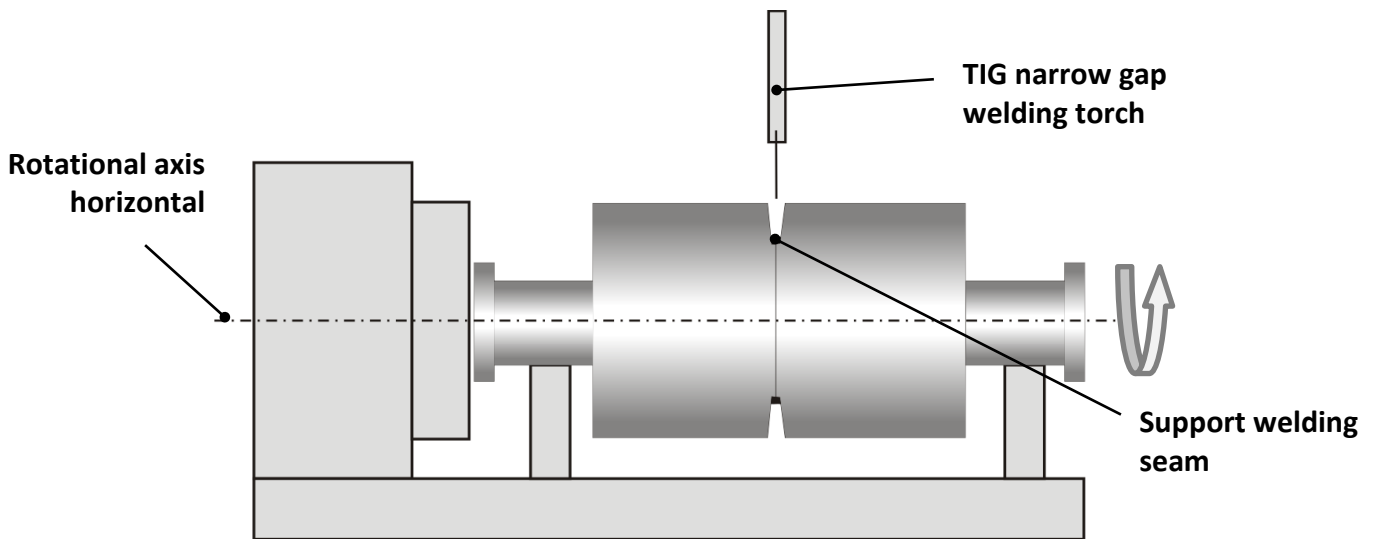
Support welding scheme - H-H/TIG-TIG
